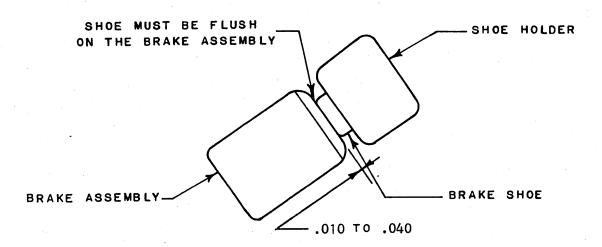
TAPE BRAKE ADJUSTMENT.
